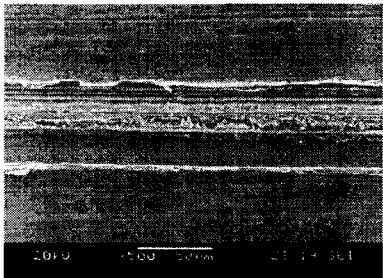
Groove machined with a rectangular tool: 6000 rpm, 5 μm feed, and 5 μm depth of cut
